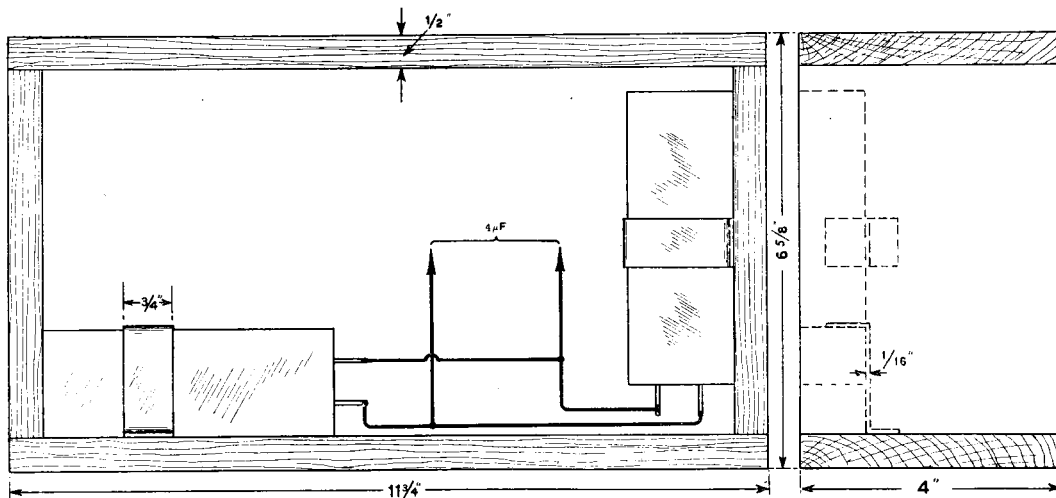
Dimensional drawing of the cabinet, showing the fixing of the condensers.
